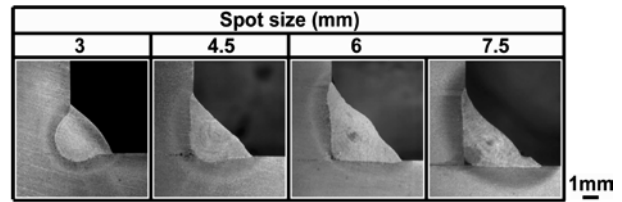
Cross sections of weld bead on each spot diameter.
